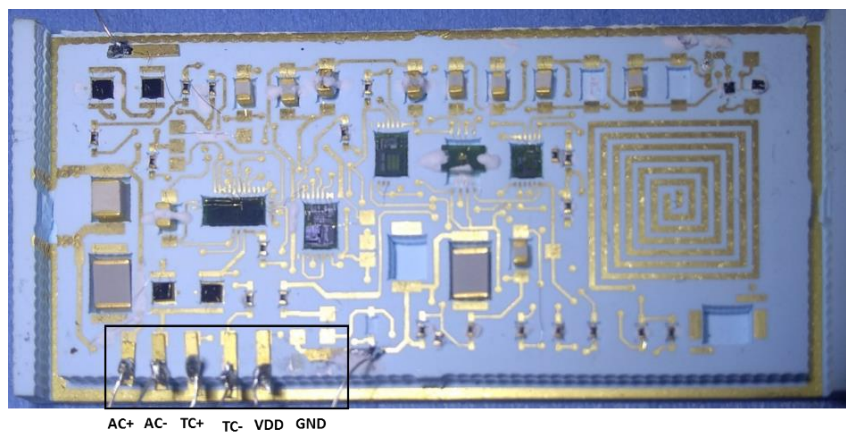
Fraunhofer module-1 (with the complete thick gold trace on the outer periphery) after complete assembly.
